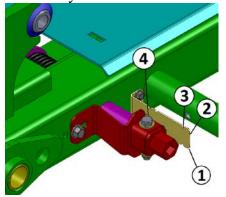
Indicator Reference Key 1 – Indicator Key 2 – V-Groove Side Mark Key 3 – Front Side Mark Key 4 – Adjuster Washer
